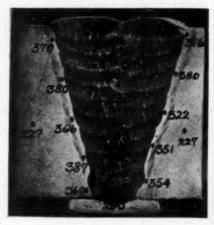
Butt welded joint in 2 in. thick armour plate using 25/20 austenitic electrodes.
